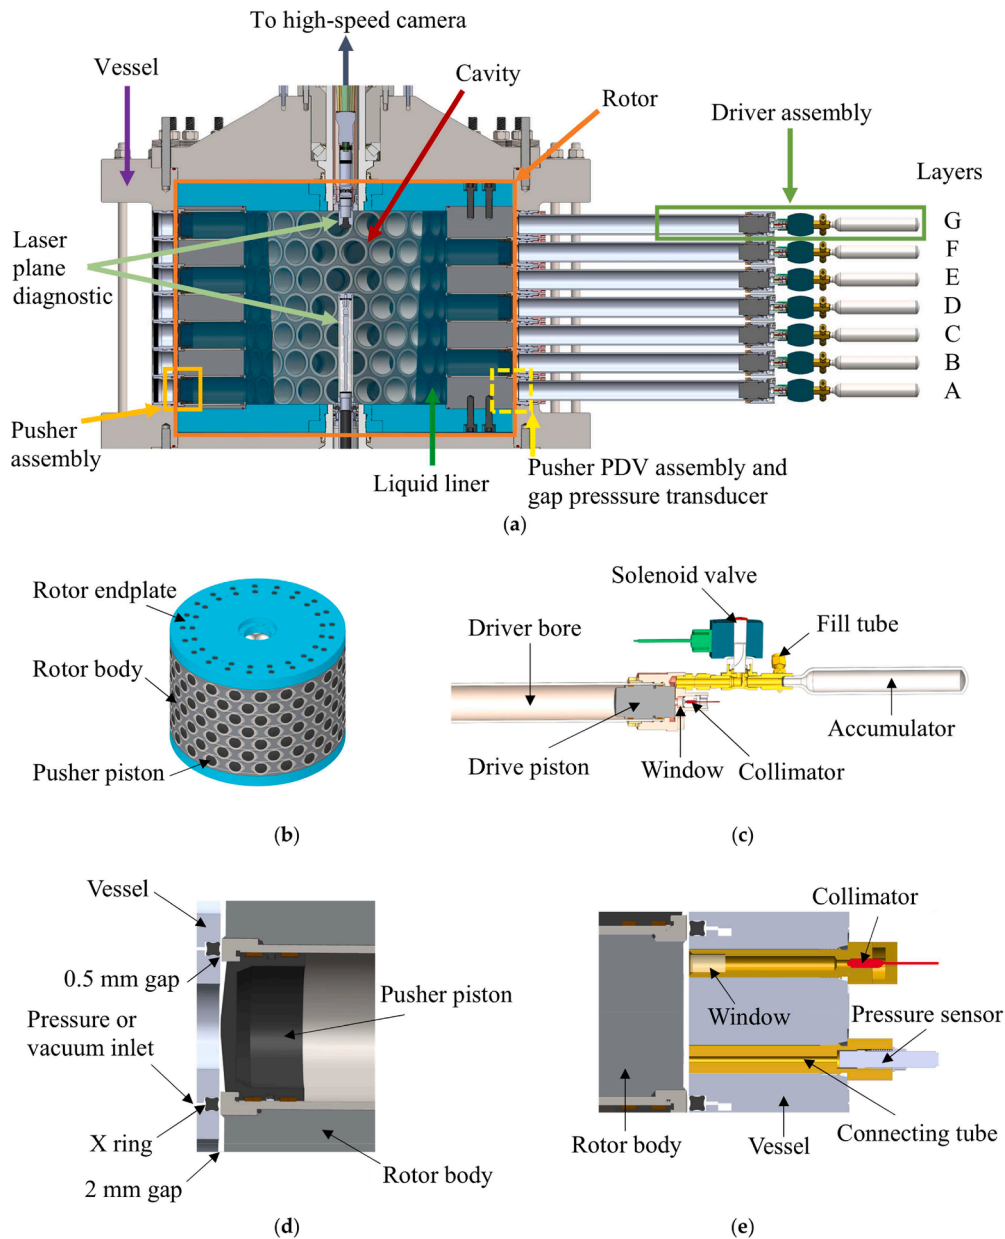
CWC (photograph presented in Fig. 1b) CAD model and sub-components. (a) Cross-section view of the CWC with rotor, diagnostics, and a representative column of driver assemblies shown on the right-hand side. (b) Isolated view of rotor. (c) Cross-section view of driver assembly. (d) Cross-section view of pusher piston assembly and sealing system. (e) Cross-section view of pusher piston photonic Doppler velocimetry (PDV) collimator assembly and pressure transducer insert. These inserts are on a section plane other than shown in (a), azimuthally bisecting the spacing of the driver bores.
